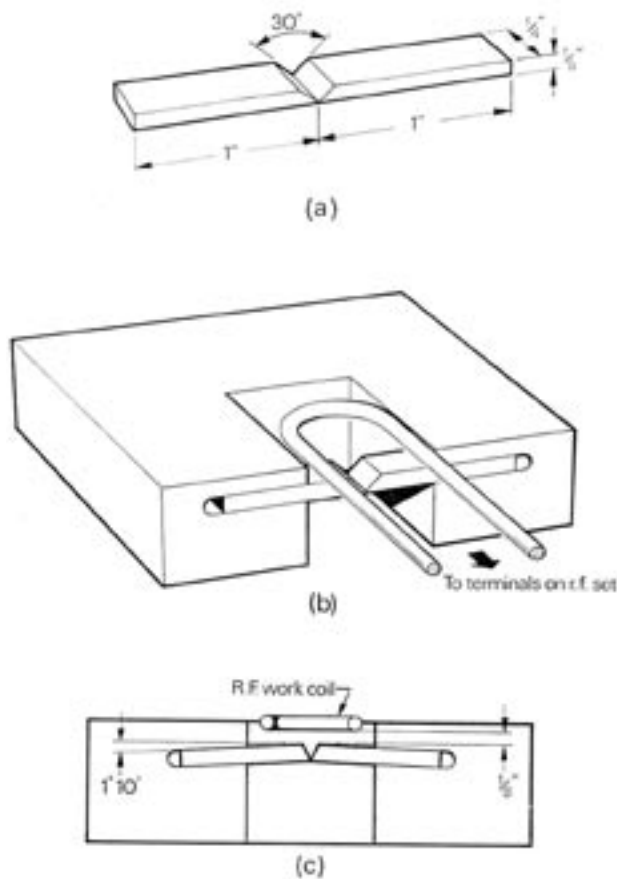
Details of the design and method of brazing of impact bending test-piece used in the investigation of brazed joint embrittlement by trace impurities; (a) shape and dimensions of the test-piece; (b, c) brazing jig and positioning of the HF induction heating coil relative to the work-piece
